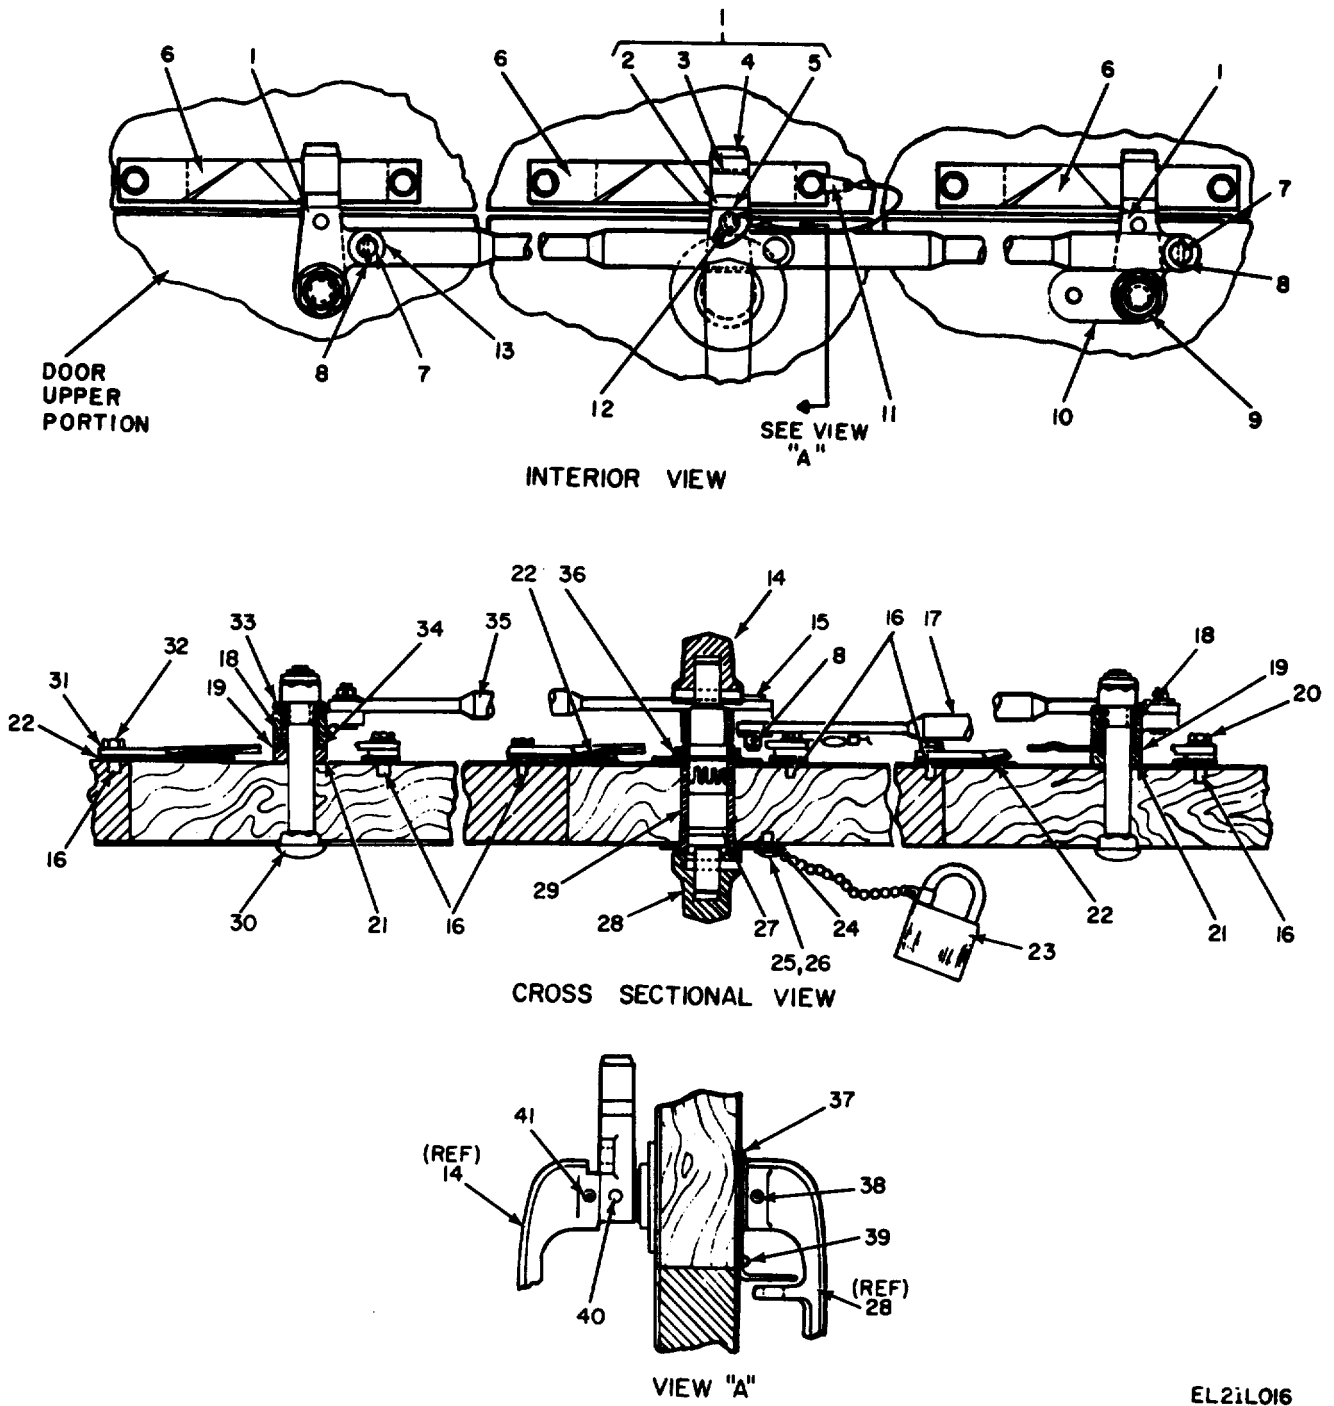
Door Assembly, Latch and Handle S-280B/G Shelter.
